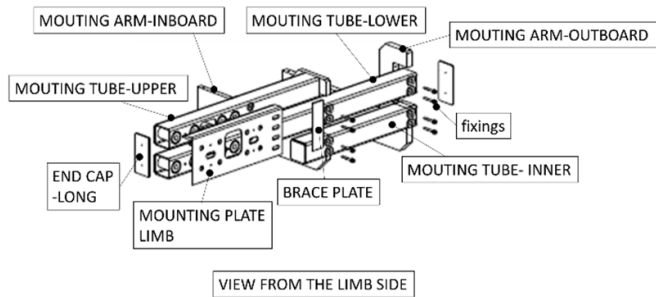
Exploded view of the DIR-M4 mirror mounting frame assembly listing the key components.
